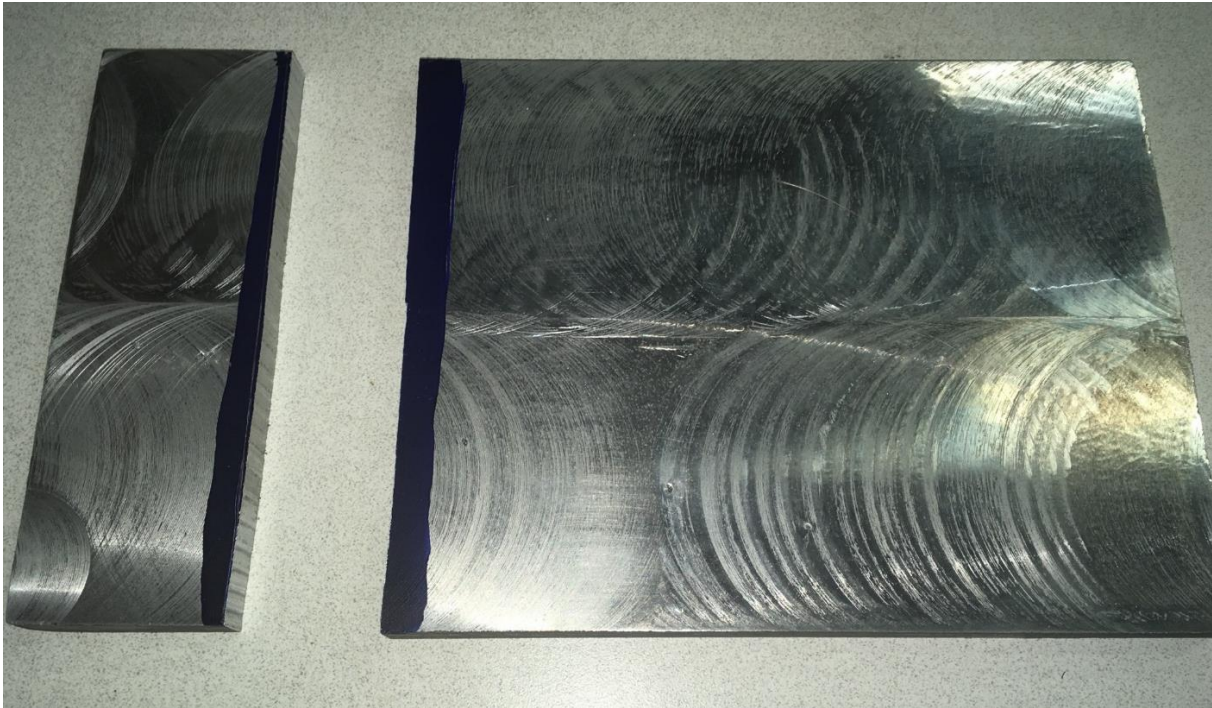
Surfaced and cut Al-10Si-7Ce-4.3Cu-0.4Mg base plate (6-inch by 10-inch); left piece demonstrates size of pieces utilized for BOP welding
